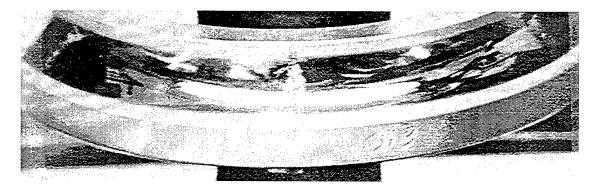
Photo of TDC Coated Bearing Spall Failure at 1002.7 Hours.
